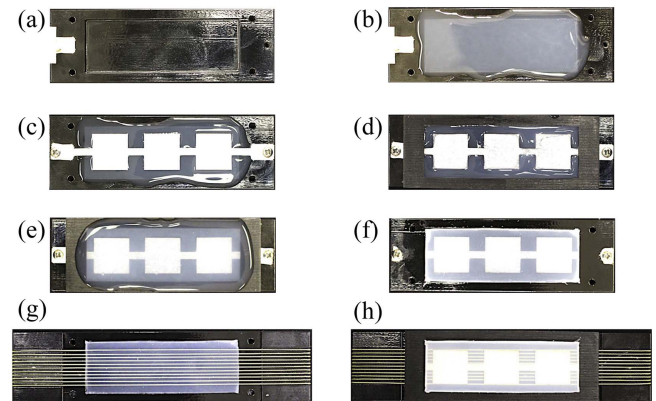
Photos of actual fabrication steps for 3×1 multi-cell FPAM: (a) bottom core mold (figure 3(a)), (b) liquid silicone in bottom core mold (figure 3(b)), (c) water-soluble mask on liquid silicone (figure 3(c)), (d) top mold added (figure 3(d)), (e) liquid silicone on mask (figure 3(e)), (f) cured core (figure 3(f)), (g) Kevlar fibers on cured bottom outer layer (figures 3(i) and (j)), and (h) core bonded to Kevlar fibers and bottom outer layer (figures 3(j) and (k)). (g) and (h) are repeated to complete prototype with top outer layer and Kevlar fibers.
